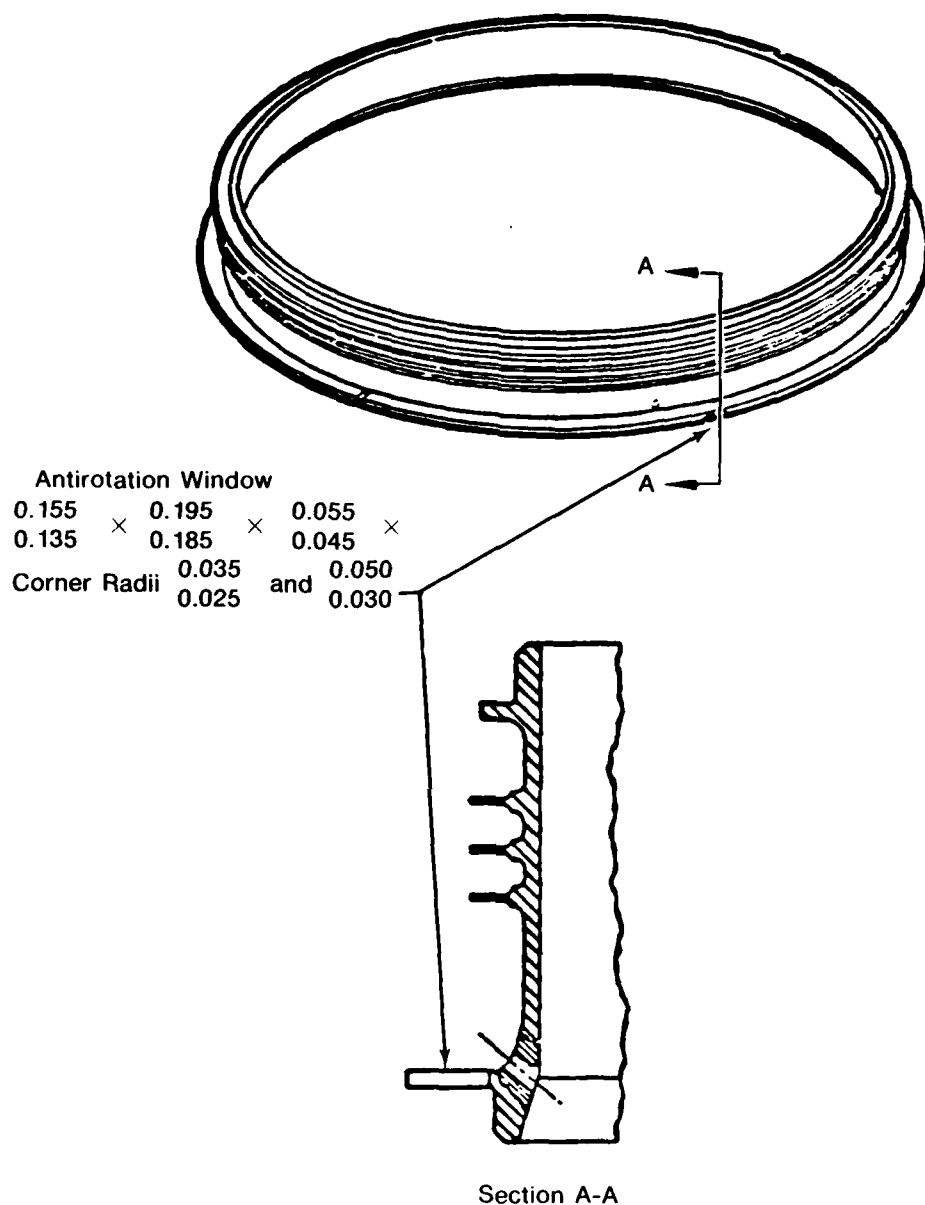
8-9 Compressor Spacer (P/N 4050978)
